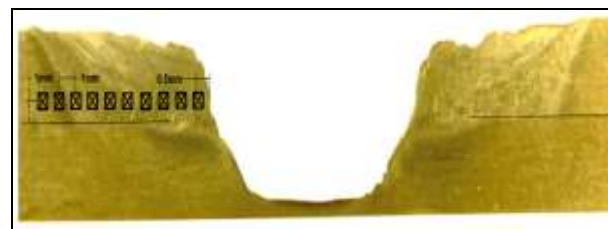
Cross-section of the FSSW welded sample and schematic of hardness points
